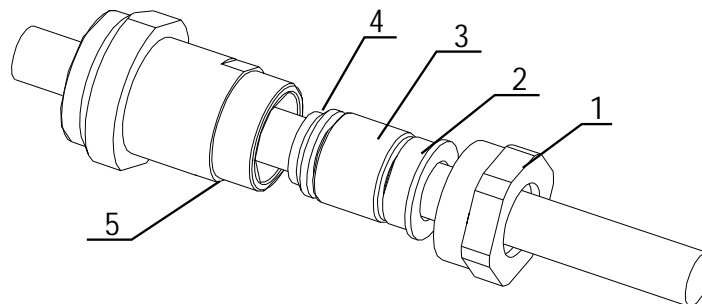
Assembling a Power Cable Connector (step 1)
